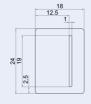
Schematic drawing of adhesive tape gasket for Fluidic 1012 - straight channel shape
